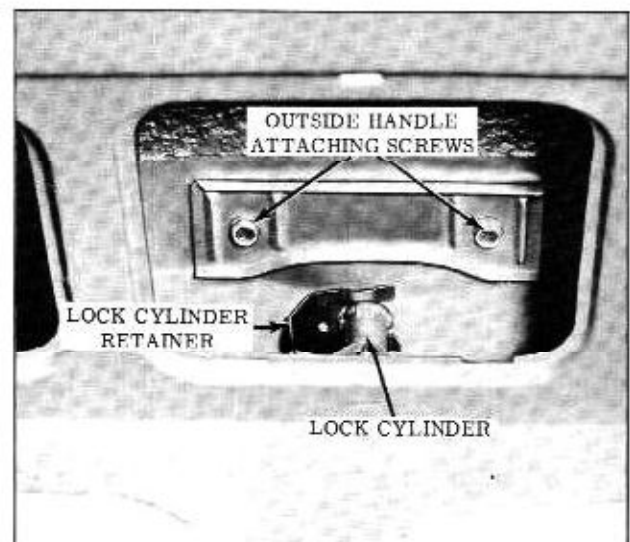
Back Door Outside Handle & Lock Cylinder
